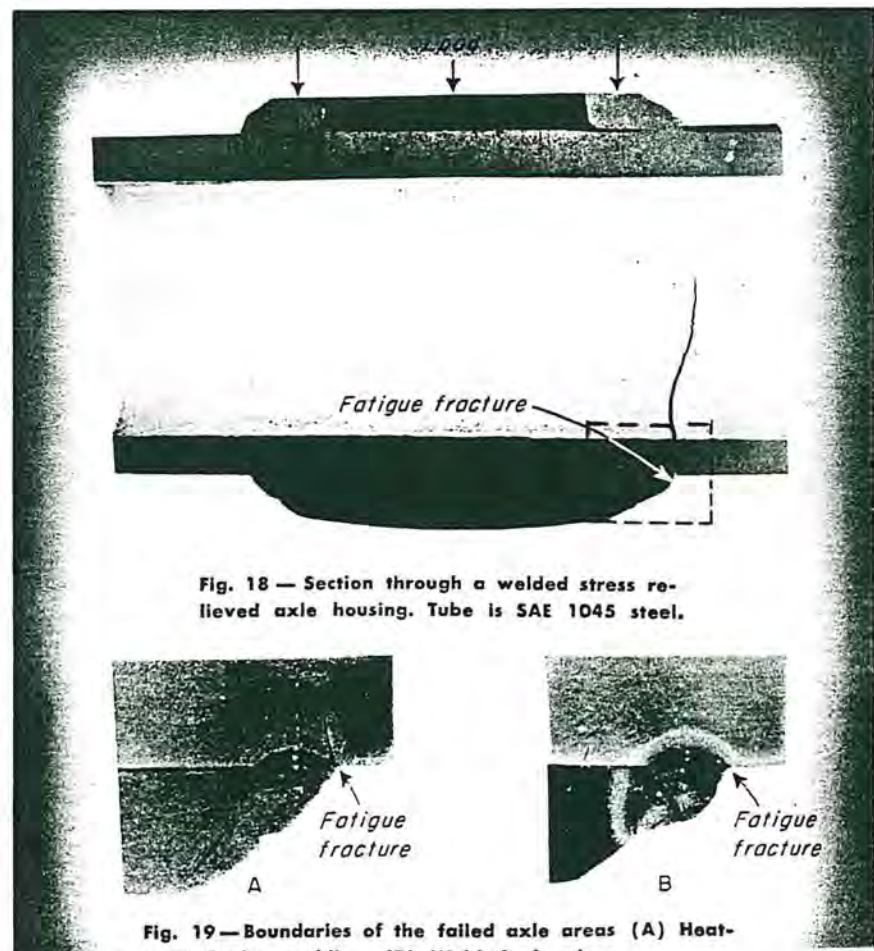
Section through a welded stress relieved axle housing. Tube is SAE 1045 steel.
